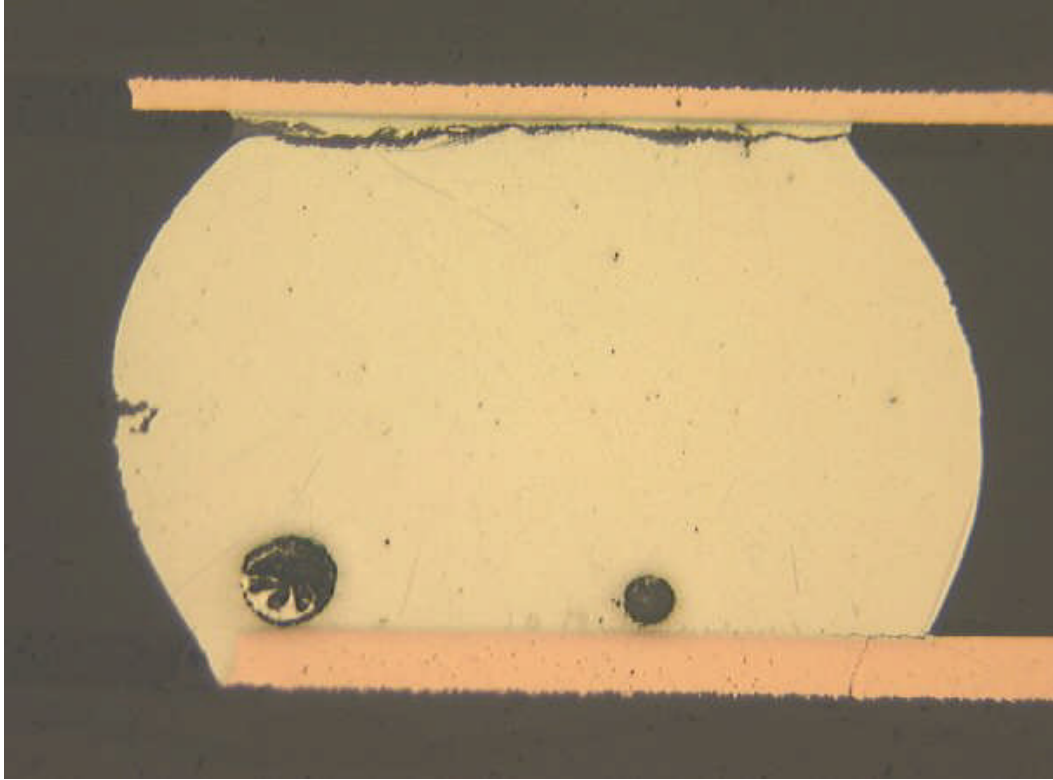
Ball interface fracturing, trace fracturing, and voiding in component BGA U4 from Vibration Board 77.
